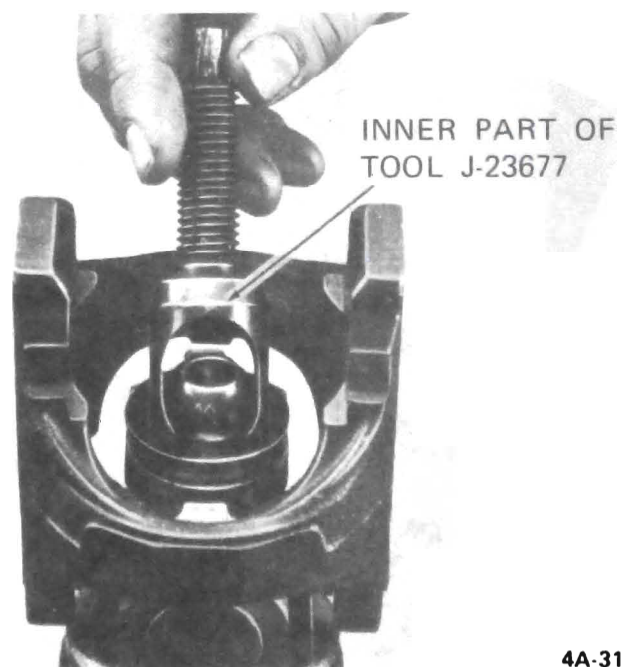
A-31 First Step - Removing Centering Ball with Tool J-23677
